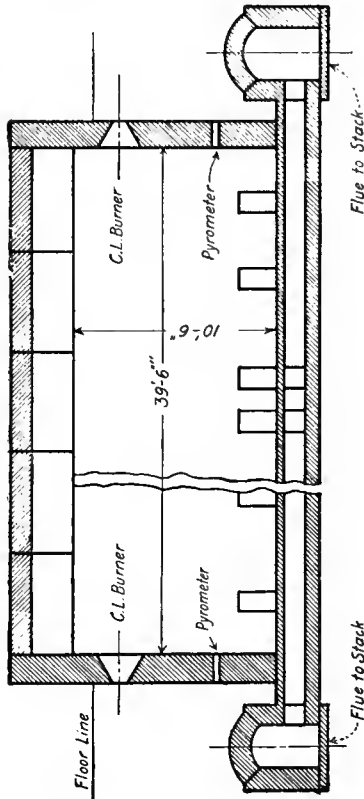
shows the longitudinal cross-section of the large furnace and Fig. 79 a transverse section.
